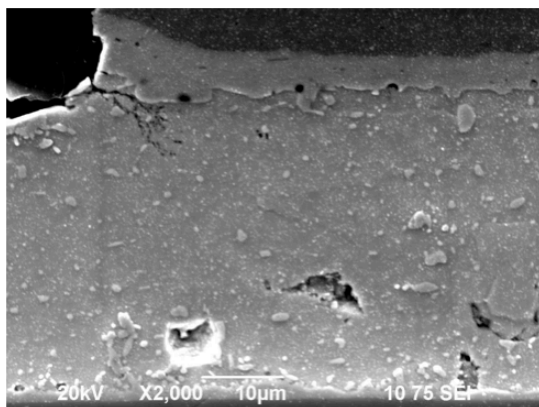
SEM image of one of the solder joints in Component AT30 on Board F07
